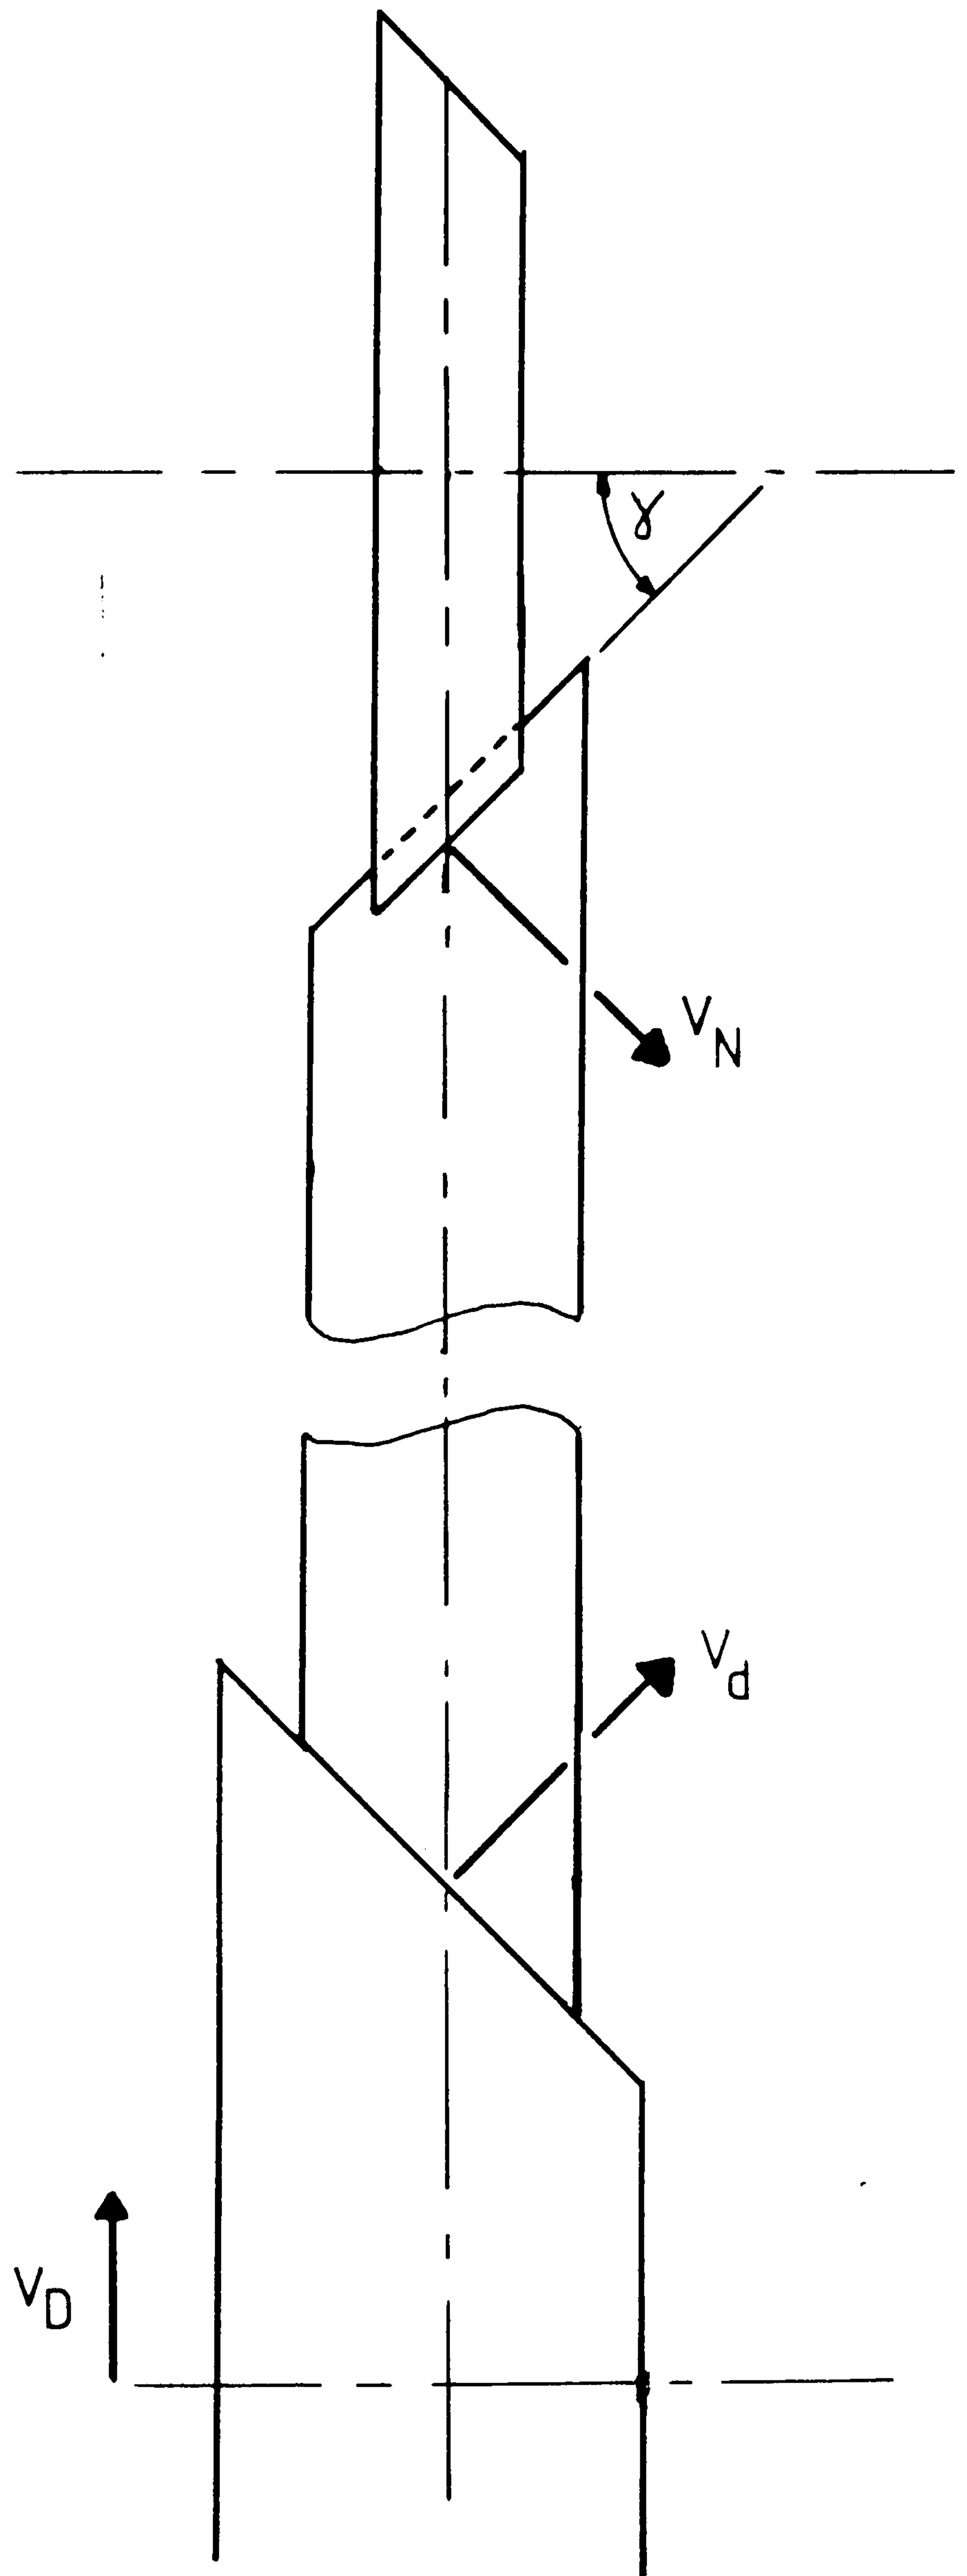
CREEP-FEED GRINDING ON ANGLED FACES
